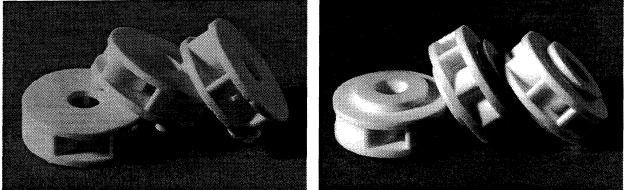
A. 25mm Sintered Alumina Impellers Figure 3B. 30mm Polyurethane Turbines
